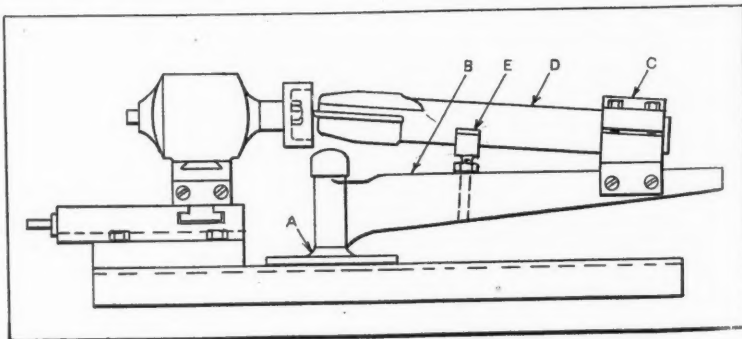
Side View of Grinding Fixture Shown in Fig. 2
